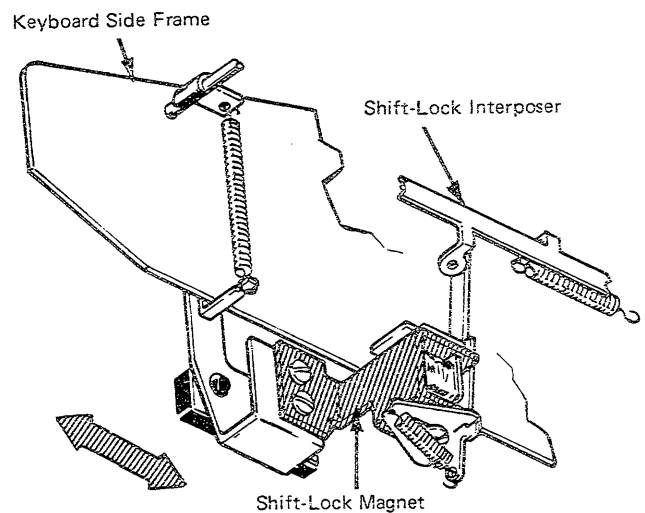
Shift-Lock Magnet (835 and 935 Printers)
